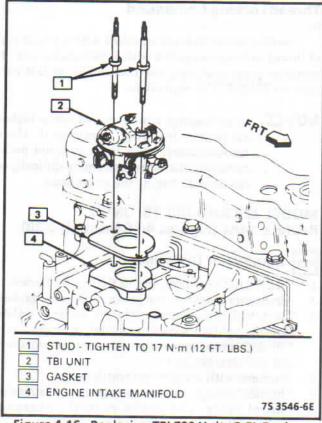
Replacing TBI 700 Unit - 2.5L Engine
